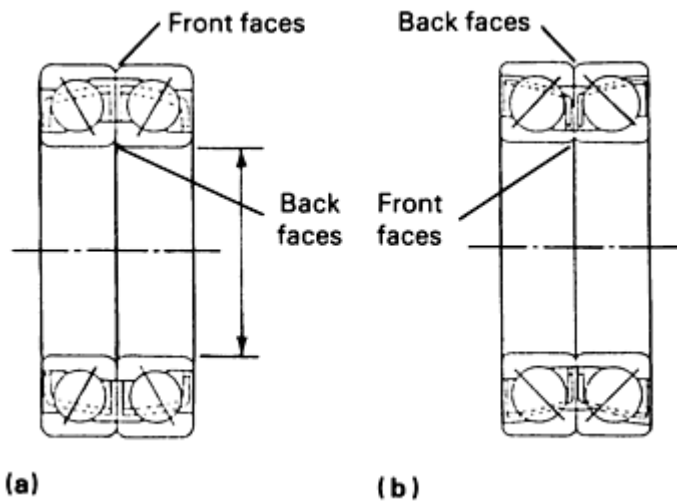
Duplex angular-contact ball bearing arrangements used to accommodate thrust loading induced by applied radial loading. (a) Face-to-face mounting. (b) Back-to-back mounting
